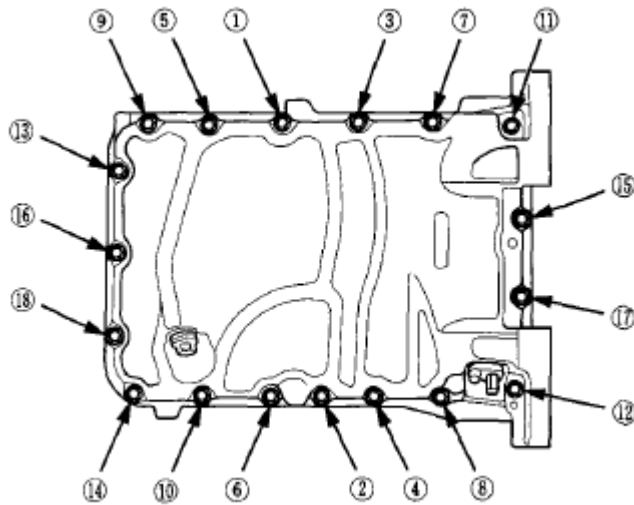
Identifying Oil Pan Bolts With Tightening Sequence
